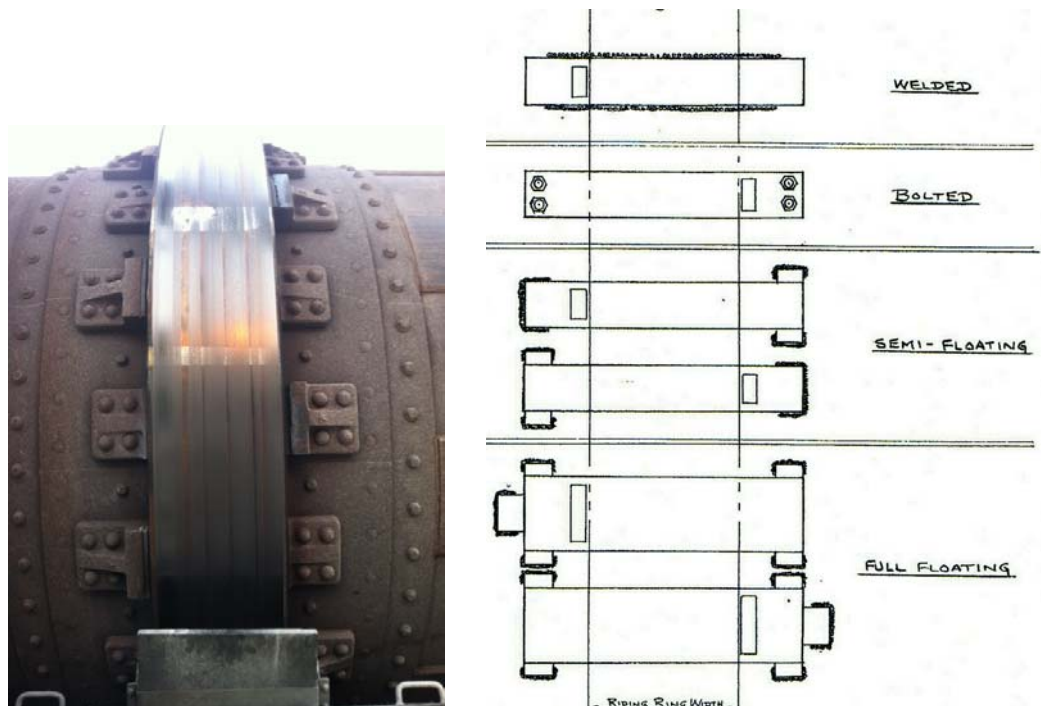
Left: Riveted design. Right: Evolution of filler bars.
